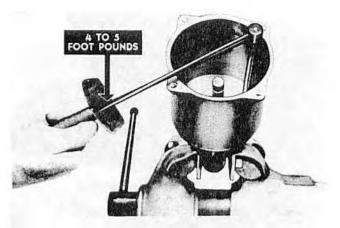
Torque Tightening the Cylinder Shell Cap Screws
